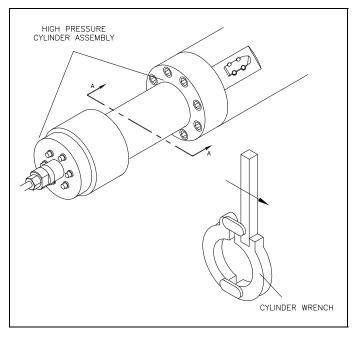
High Pressure Cylinder Assembly Removal and Installation
